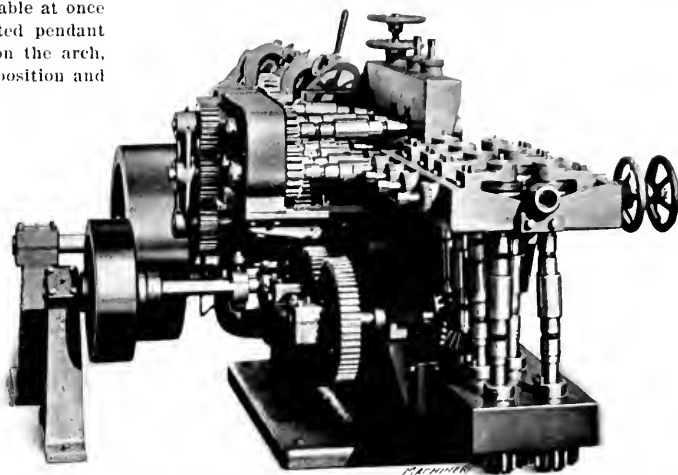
Rear View of Shuster Straightening and Cutting-off Machine
